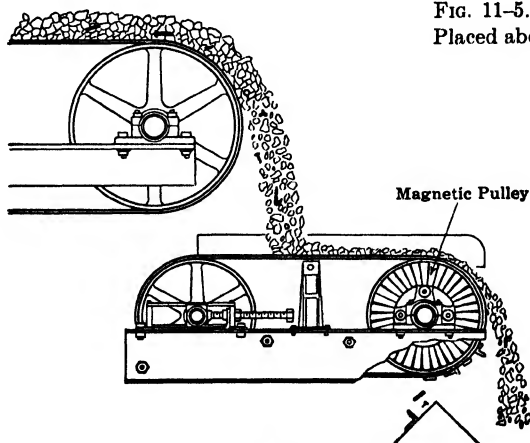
Conveyor Discharging to Wide Separator Belt.
